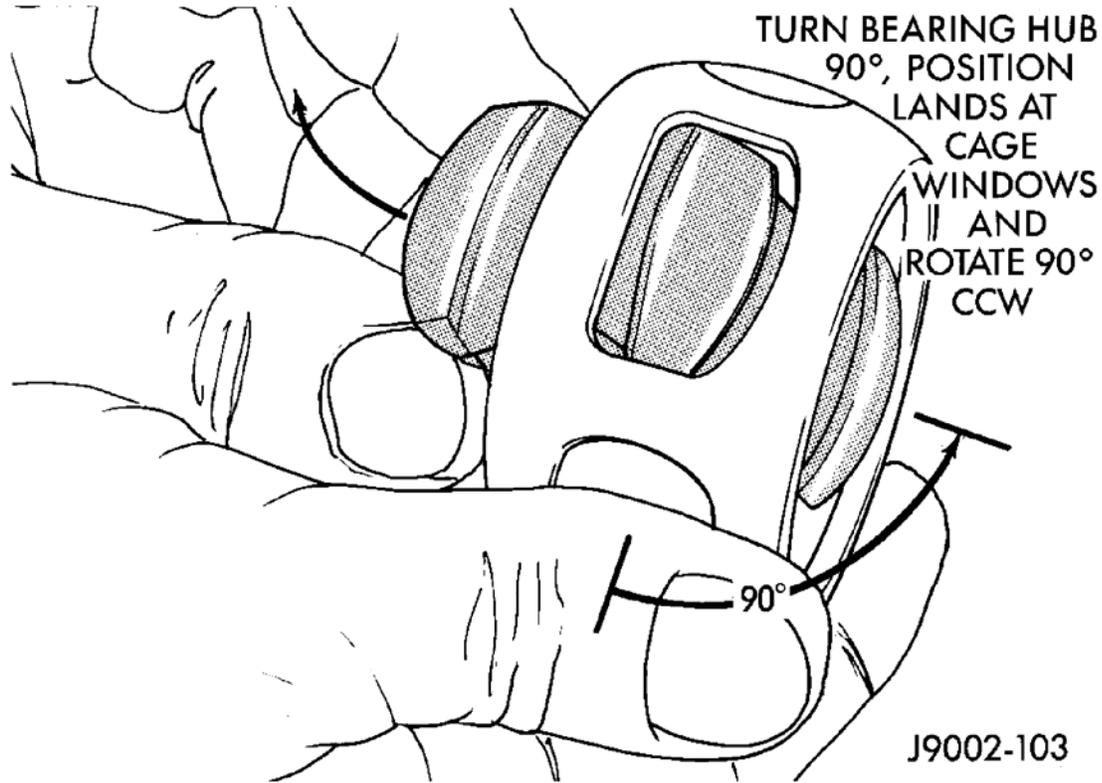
Turning Inner Race 90° In Cage And Rotating Inner Race/Hub Out Of Cage
